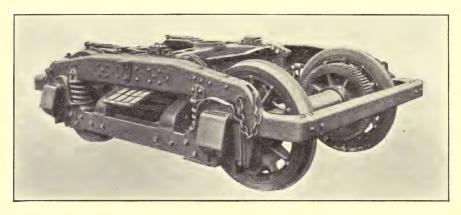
New York, New Haven and Hartford Truck Used on Motor-car Trains. Truck for two single-phase, 150-h. p., quill-mounted, Westinghouse motors; used on New York Division. Trucks built by Standard Motor Truck Company.
